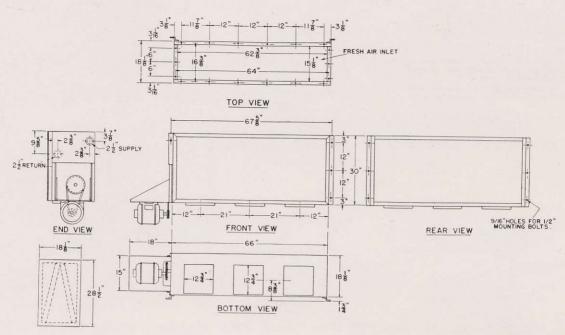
No. 1866 Type "R" Unit Heater. Inverted Wall Mounting.
